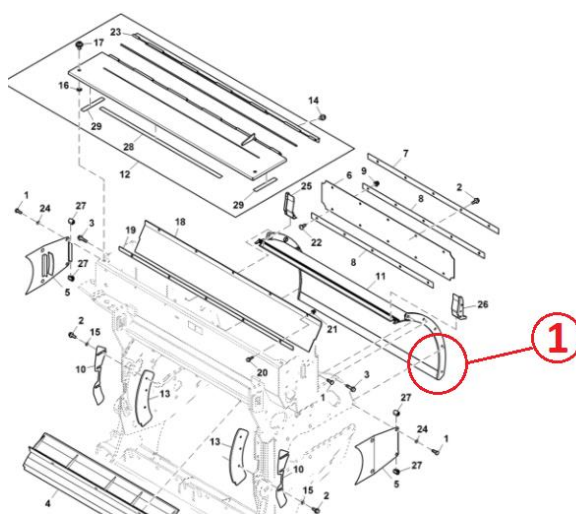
Weld Nut or Tapped Hole Removal
